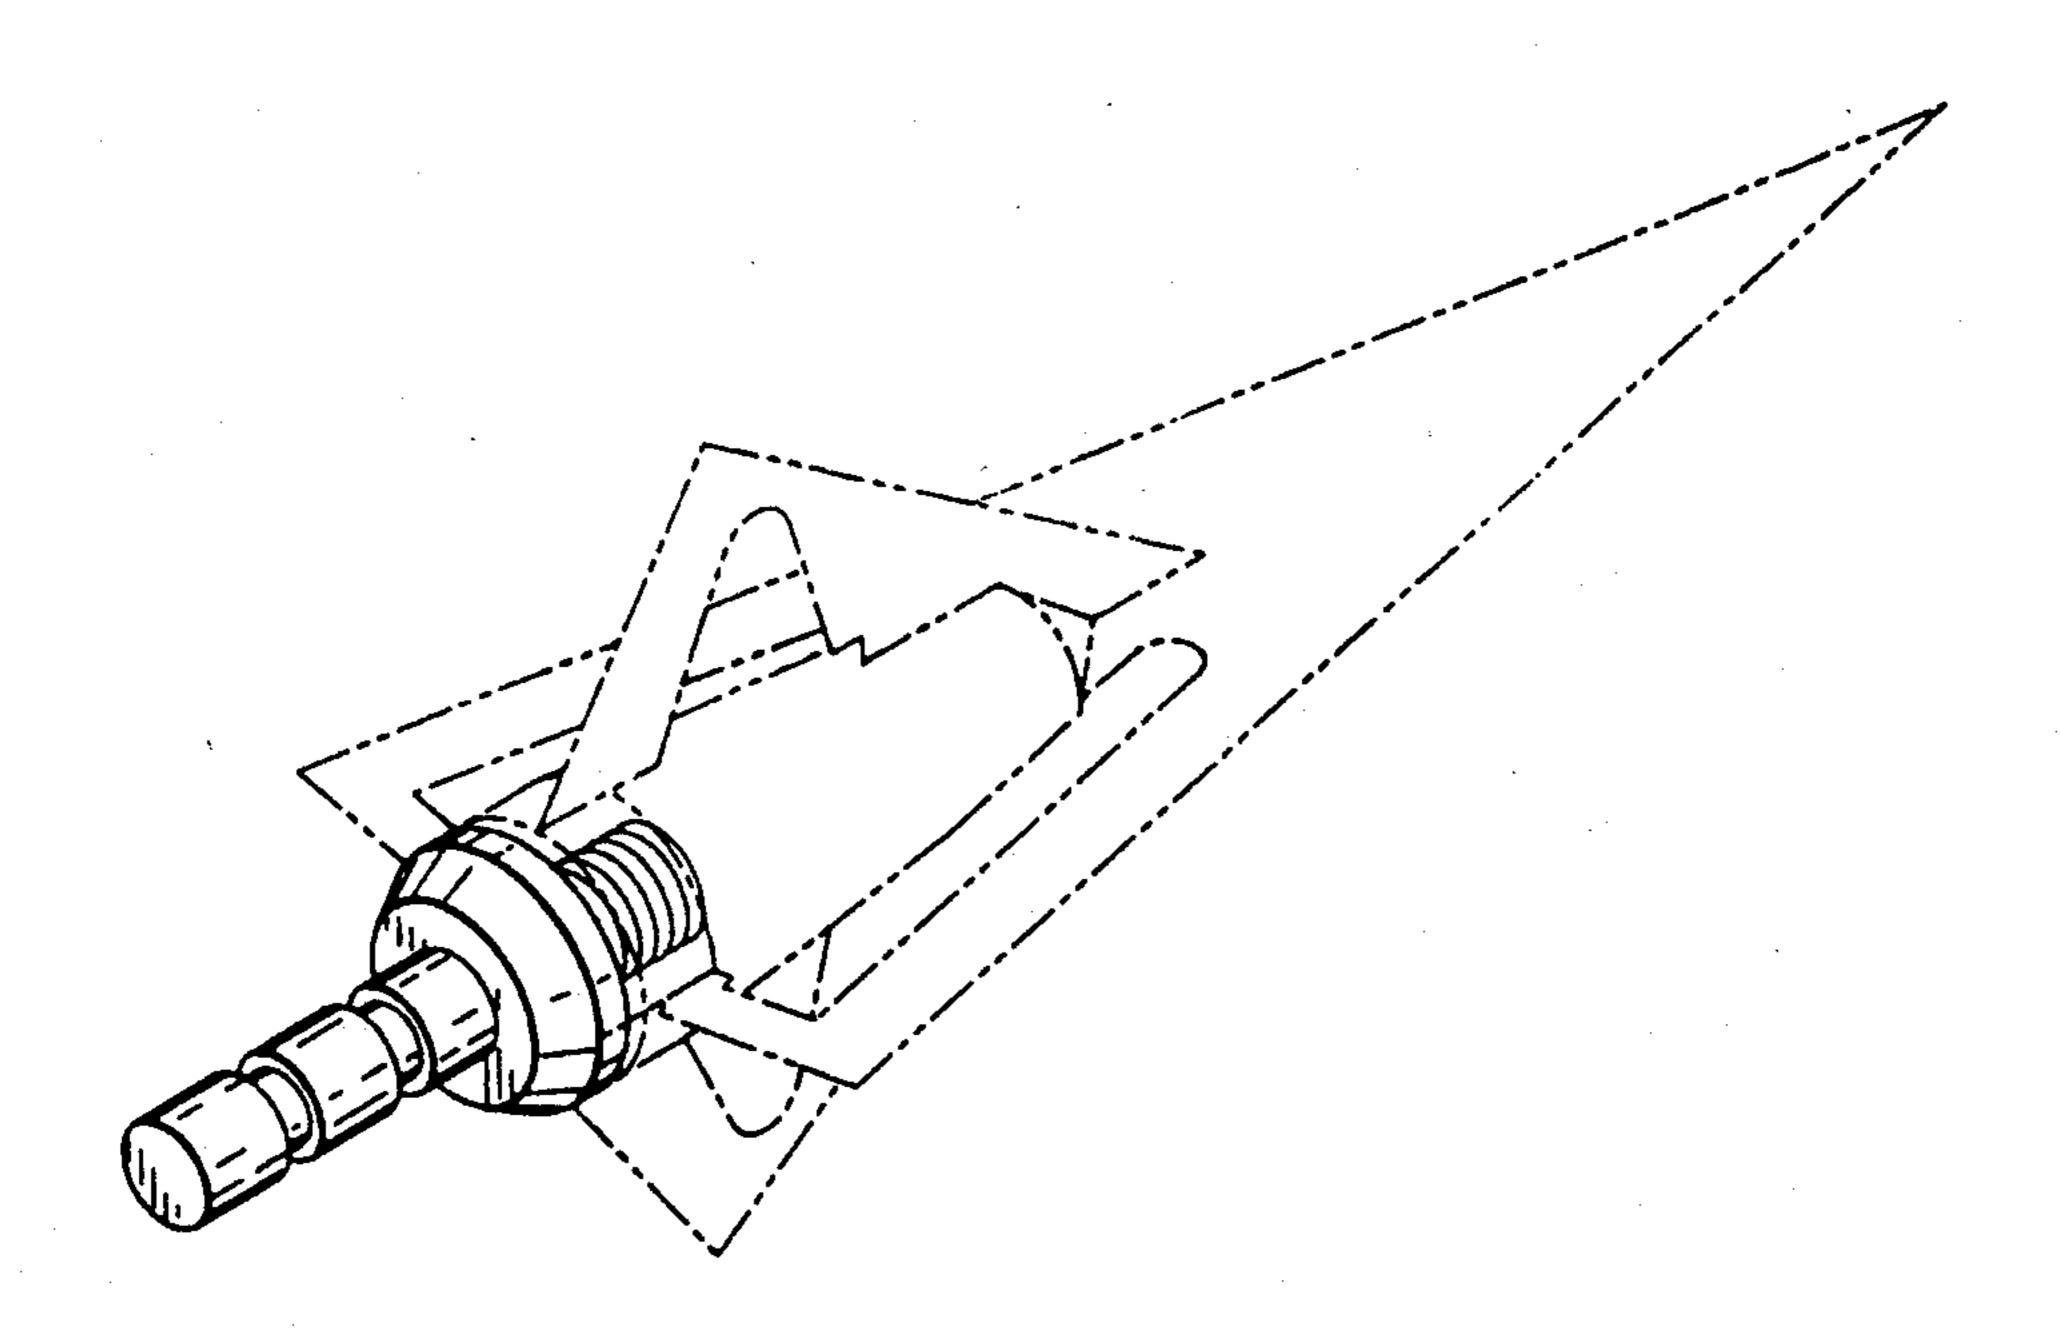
is a right-rear perspective view of a broadhead connector for carbon-shaft bow arrows showing my new design, a left-rear perspective view being a mirror image;
